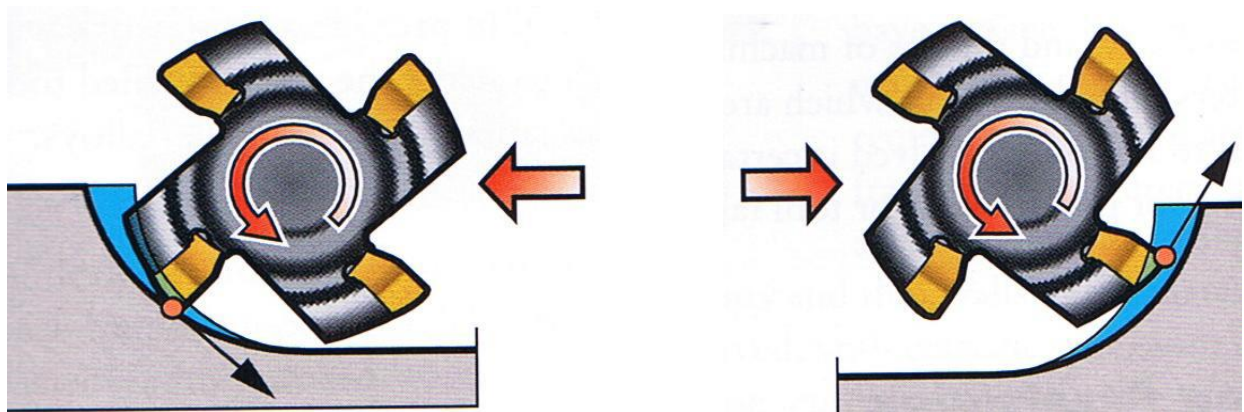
(a) Climbing milling (b) conventional milling [31] [32]
